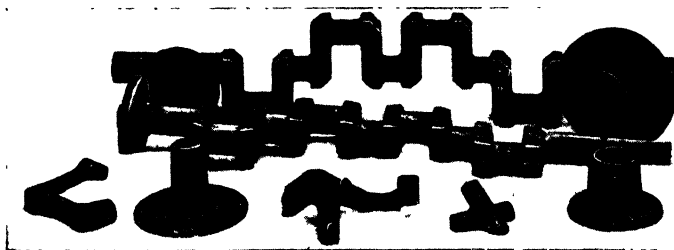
Group of motor stampings in vanadium steel. Types A and E.
